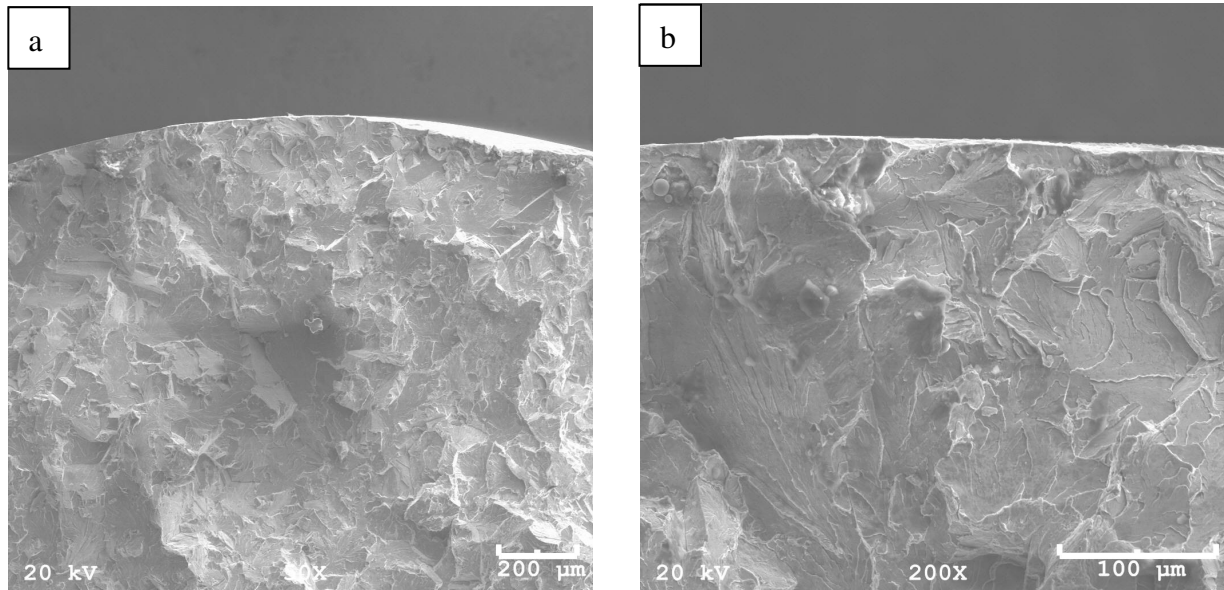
SEM photos of fracture surface of PH-42 Supra steel non-nitrided fatigue test specimen in rotating bending test: a) rupture by brittle fracture and b) detail of beginning of fatigue crack at specimen surface.
